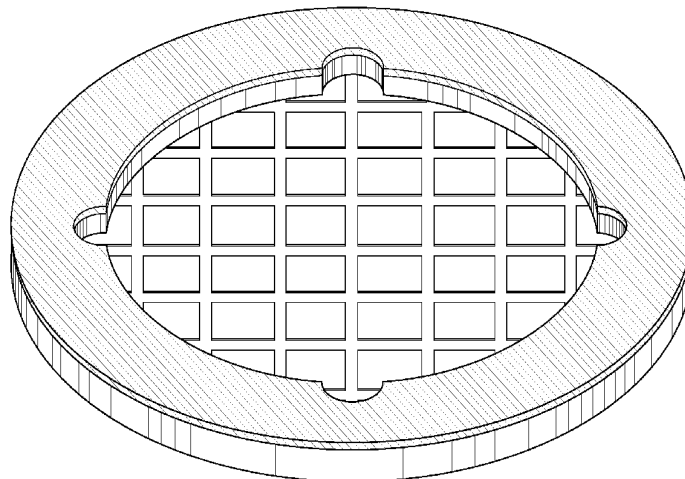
is a right side view of the wafer polishing pad holder showing my new design;
